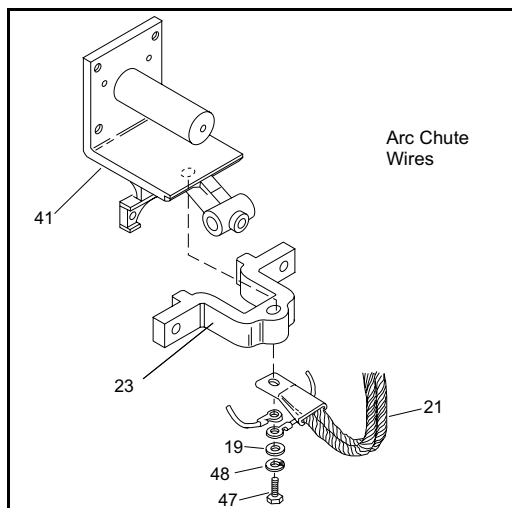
Assembling the Arc Chute Wire and Shunt Connector
